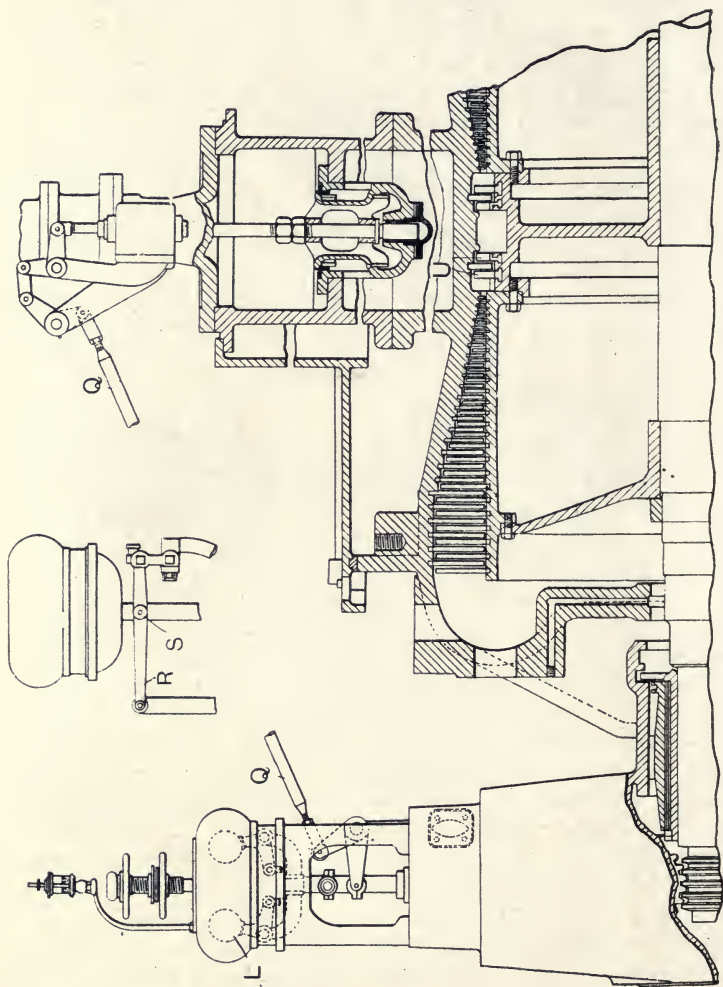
WESTINGHOUSE STEAM TURBINE. GOVERNING MECHANISM.
